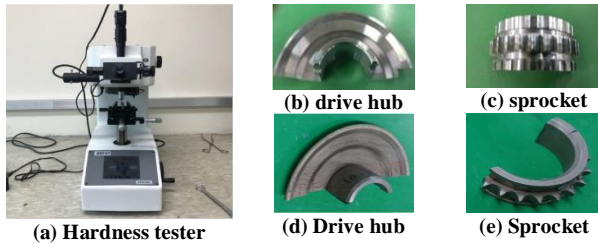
Hardness tester and specimen photograph *(a): Hardness tester (MMT-X3), (b), (c): Drive hub and Sprocket of before carburizing, (d), (e): Drive hub and Sprocket of after carburizing
